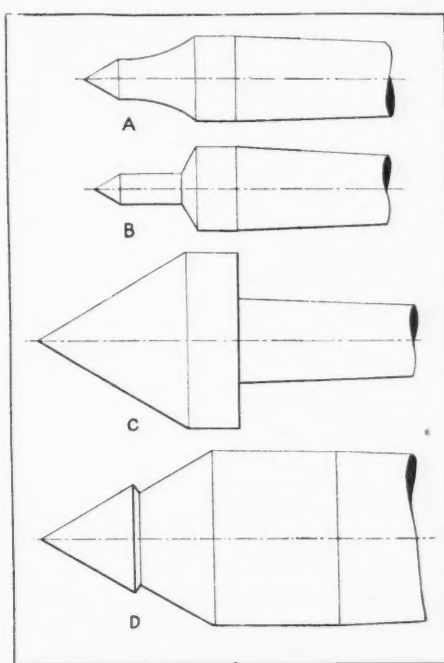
(A) Reduced Head Center designed for Strength; (B) Reduced Head Center of Usual Design; (C) Enlarged Head Center; (D) Center with Reduced Bearing Surface
